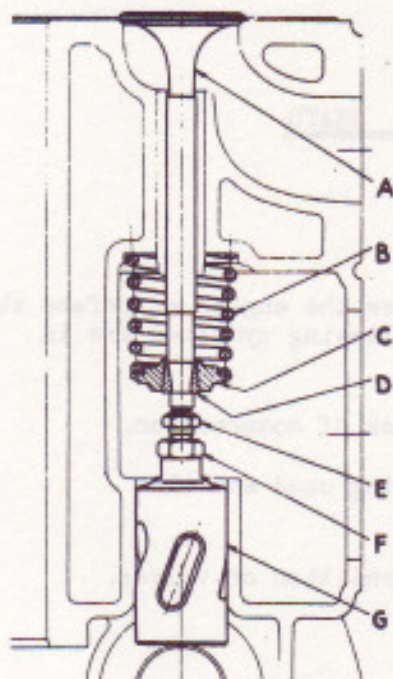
ARRANGEMENT OF EXHAUST VALVE WITH CAST IRON GUIDE.
